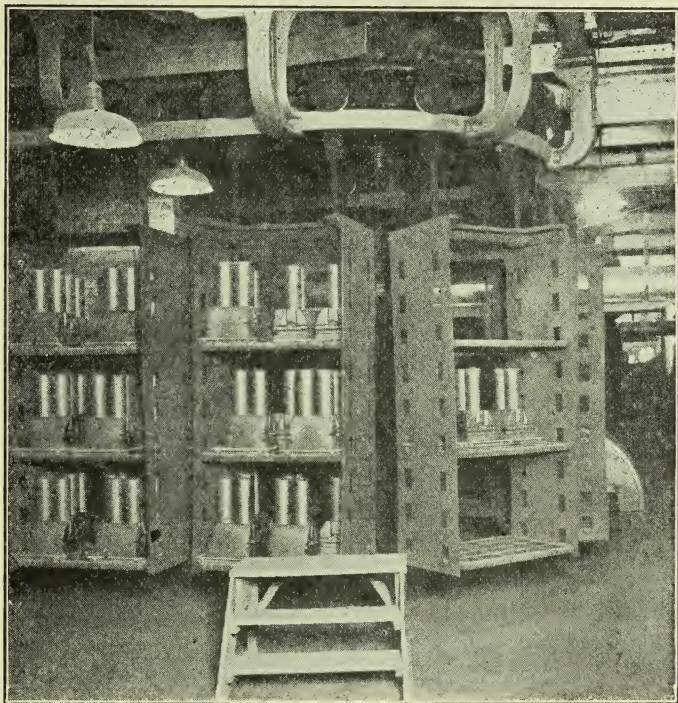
ALL OF THE MATERIAL USED IN THE COREROOM IS HANDLED PROGRESSIVELY BY MECHANICAL CONVEYORS
